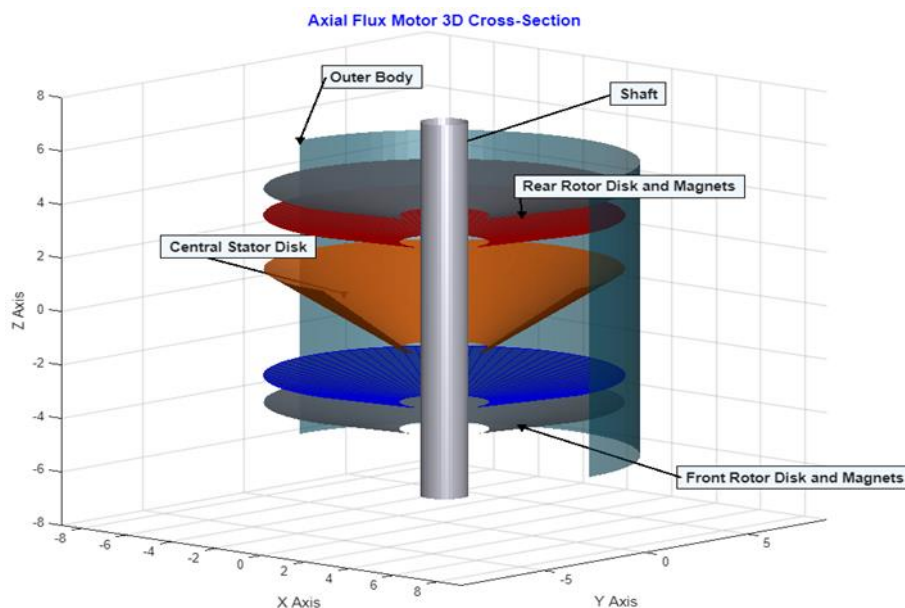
Three-dimensional cross-sectional view of a dual-rotor axial flux motor (AFM), showing the shaft, the outer body, the central stator disk, and the front and rear rotor disks carrying the permanent magnets. [Source: Generated by the author using MATLAB].
